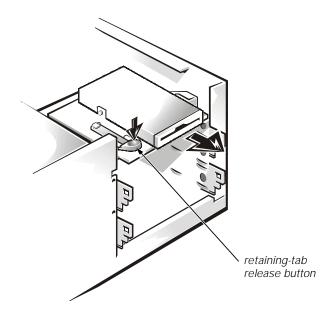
3.5-Inch Diskette Drive Assembly Removal
